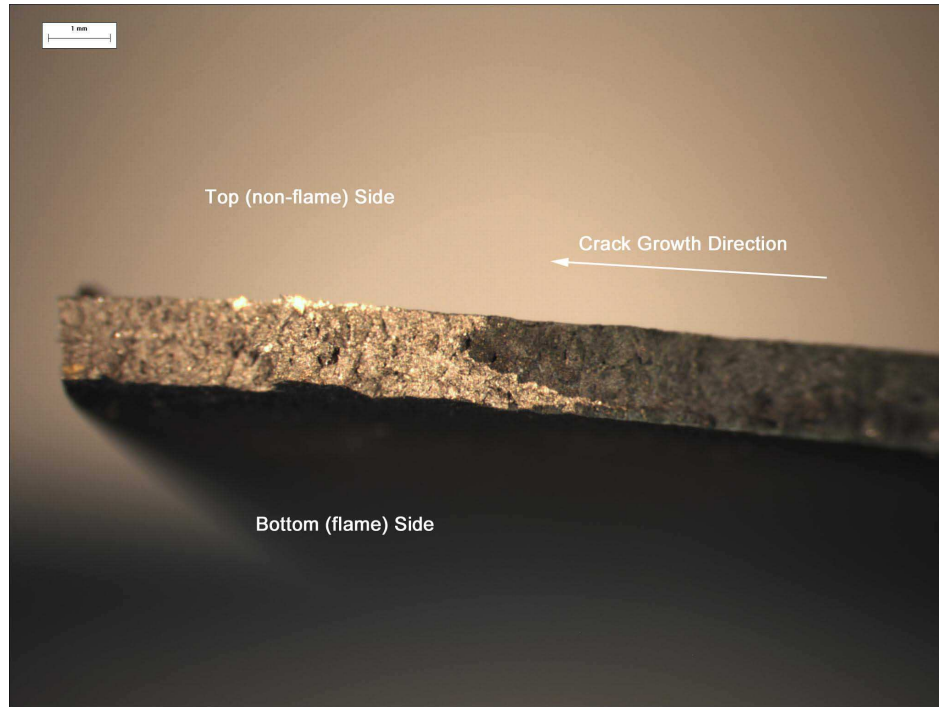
Fracture surface of crack branch A, showing the crack front separating the shiny, uncracked material on the left from the darker, oxidized crack face on the right.
